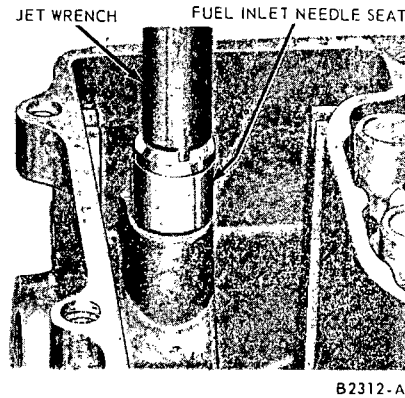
Fuel Inlet Needle Seat Removal or Installation
